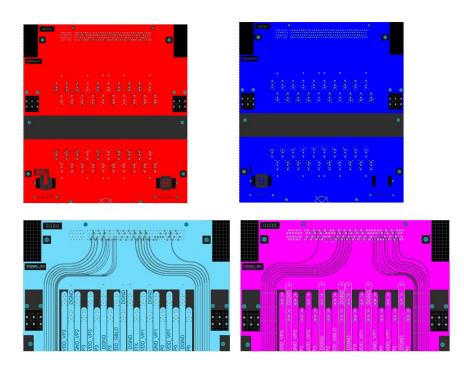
PCB layout of the production Vacuum Feedthrough Board (VFB). Top left -Top layer and Top right - Bottom layer showing the component placement. Bottom left and bottom right - High-speed signal layer in stripline environment for front and back hybrid. Credit to Jan Buytaert and Alexander Leflat, CERN.
